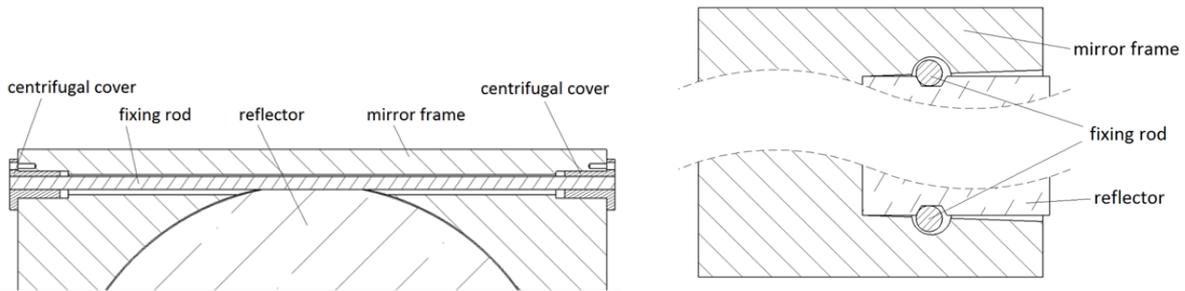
Sectional drawing I of fixing system. Figure 6. Sectional drawing II of fixing system.
